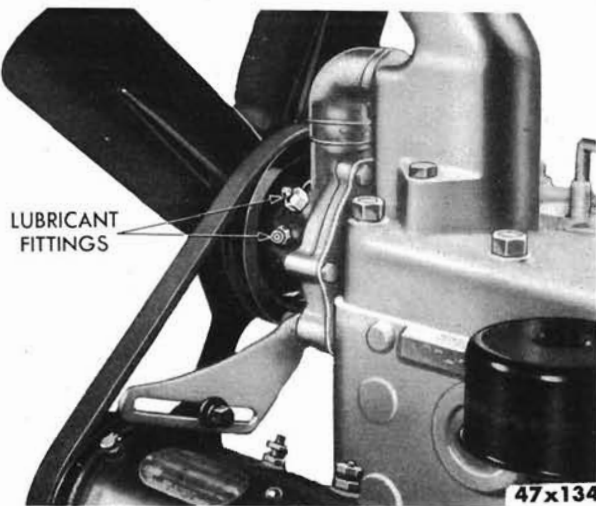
Water Pump Lubrication (Ball Bearing Type)
